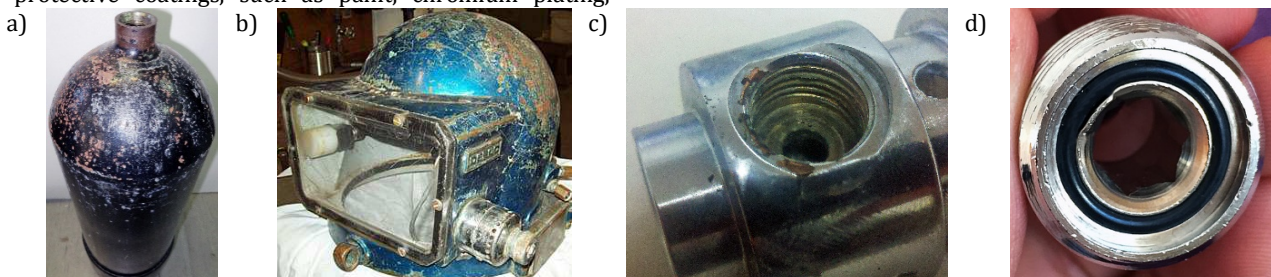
Examples of mechanical damage to components caused by physical impact:
